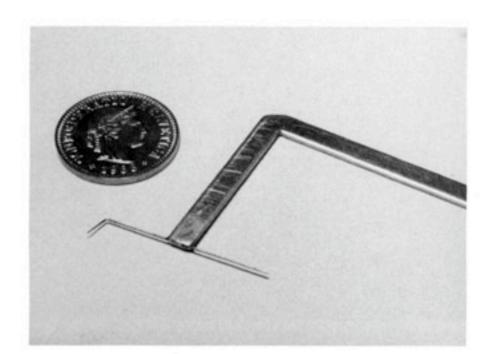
E. A small tungsten probe tip is silver soldered into the holder, the heat zone had to be limited to not degrade the tungsten tip surface.
